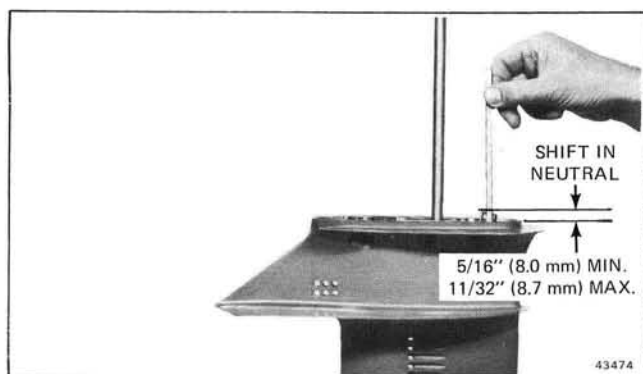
Measuring Shift Rod Height, Top of Connector to Gearcase
